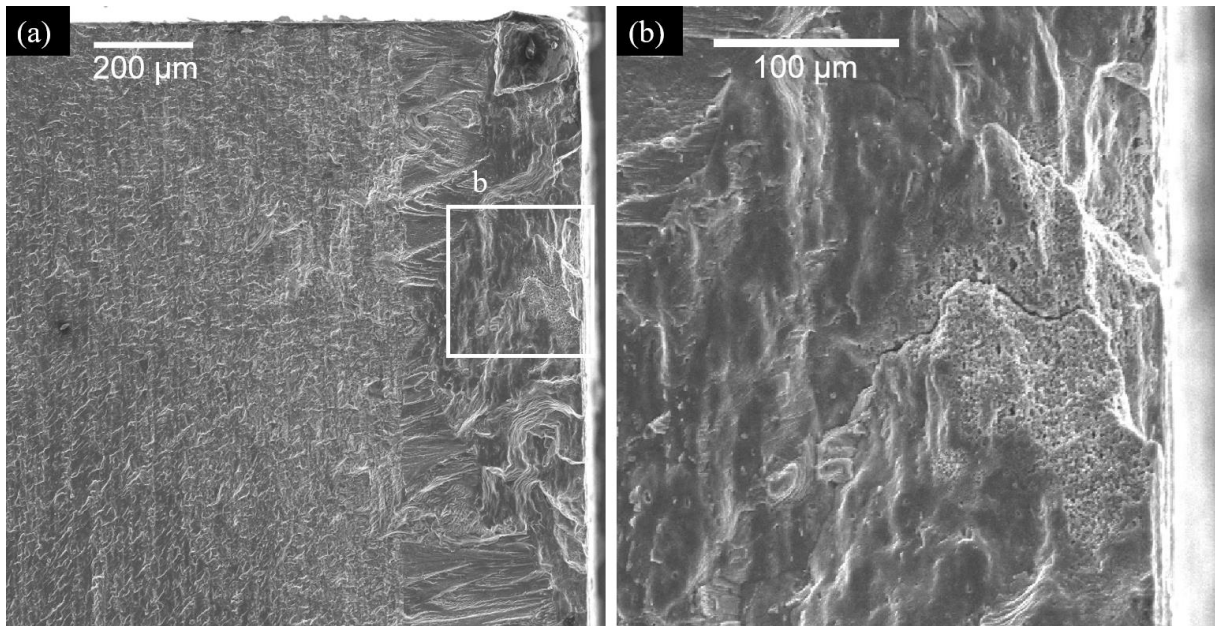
Fracture surface of as extruded specimen with 12 h pre-corrosion.
